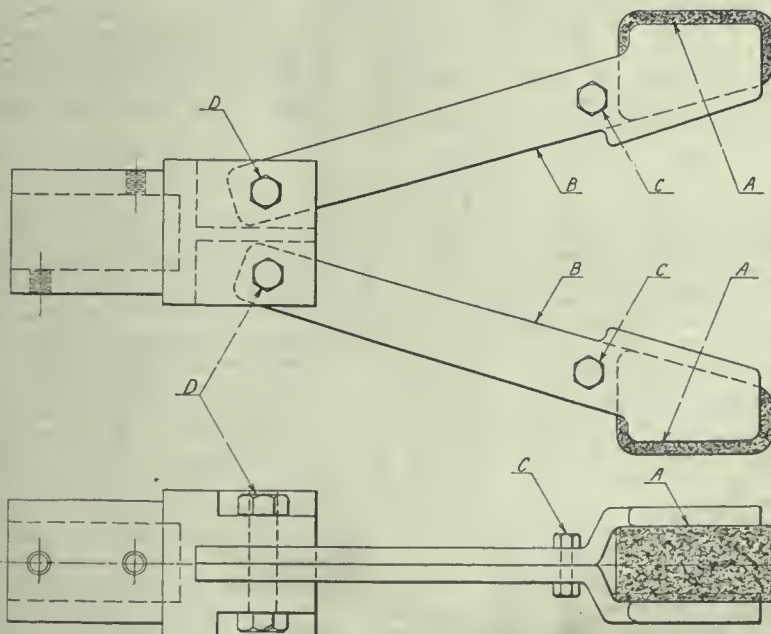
HEAD OF SMOOTHING SHELL BORE.
